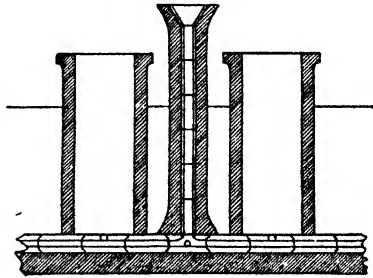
A typical bottom-casting arrangement which illustrates the use of male and female runner brick.
